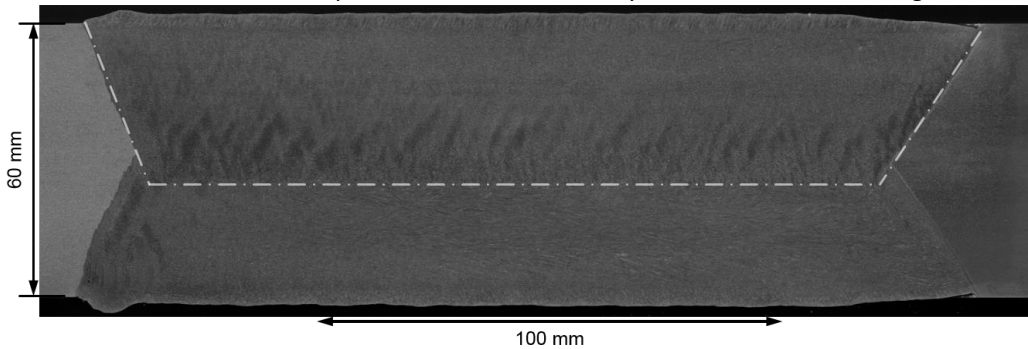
Connection weld S690QL, 60 mm, double-sided, single pass technique – longitudinal cut with highlighted second welding run
